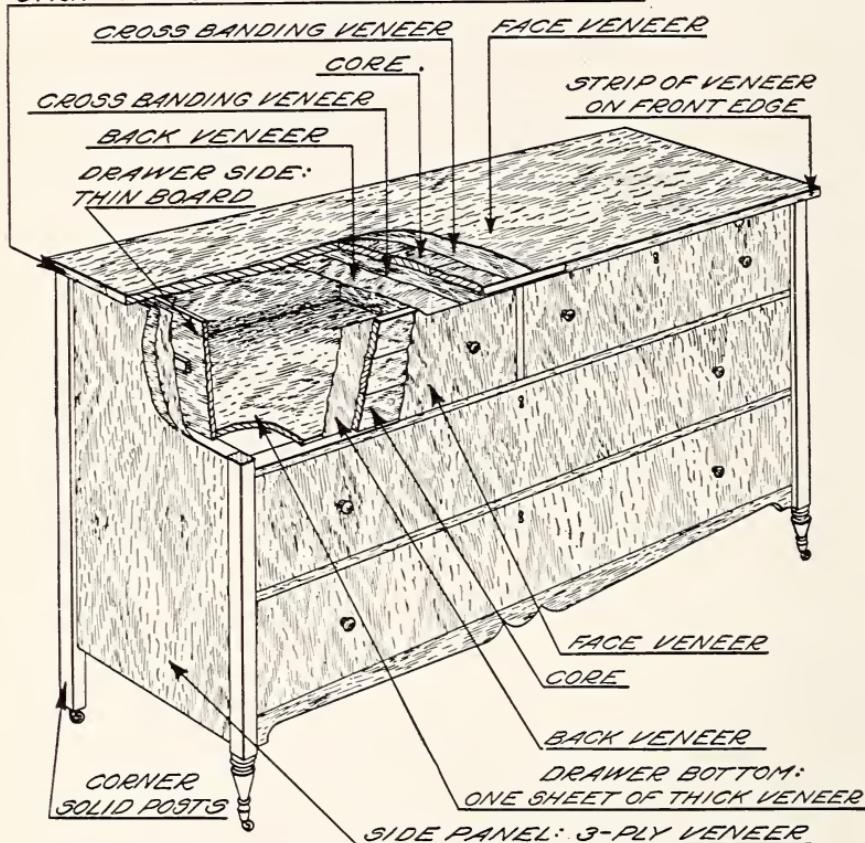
Sectional view of medium-grade dresser body, showing use of veneers
